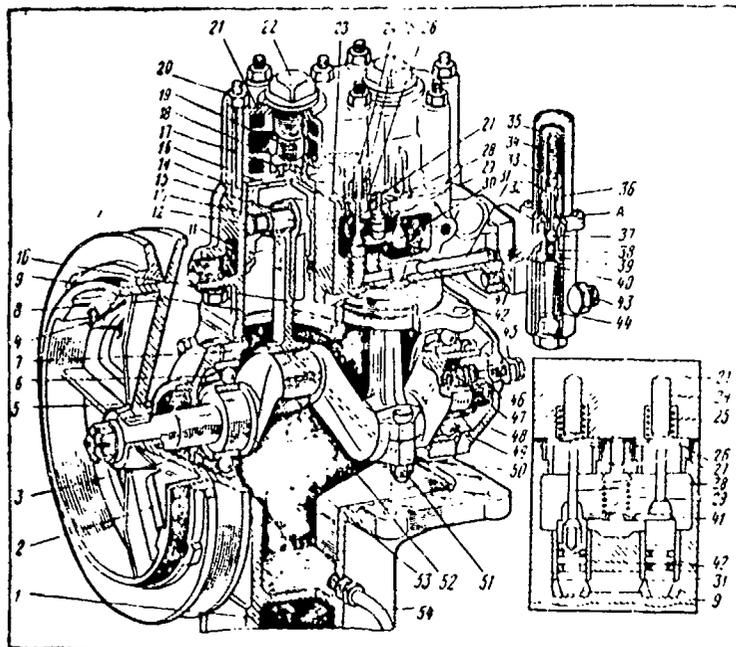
Compressor: A, channel connecting relief device to the atmosphere; 1, bracket cover; 2, adjusting clutch; 3 and 48, covers; 4, stop screw; 5, gland; 6 and 49, bearings; 7, case; 8, pulley; 9, cylinder block; 10, crankshaft; 11, oil wiper ring; 12, cap; 13, wrist pin; 14, compression ring; 15, bushing; 16, piston; 17, 27, 32 and 39, valve seats; 18, intake valve; 19, exhaust valve spring; 20 and 51, nuts; 21, cylinder head; 22, valve seat plug; 23, intake channel; 24, valve limiter; 25, intake valve spring; 26, intake valve; 28, shaft; 29, beam spring; 30, relief device and air feed chamber; 31, channel; 33, regulating cap; 34, ball spring; 35, regulator cover; 36, ball shaft; 37, regulator exhaust valve; 38, regulator intake valve; 40, filter; 41, beam; 42, relief plungers; 43, nipple for air input tube from cylinder; 44, pressure regulator; 45, nipple; 46, seal; 47, seal spring; 50, crankshaft cover; 52, crankshaft bushing; 53, crankshaft; 54, oil delivery tube
